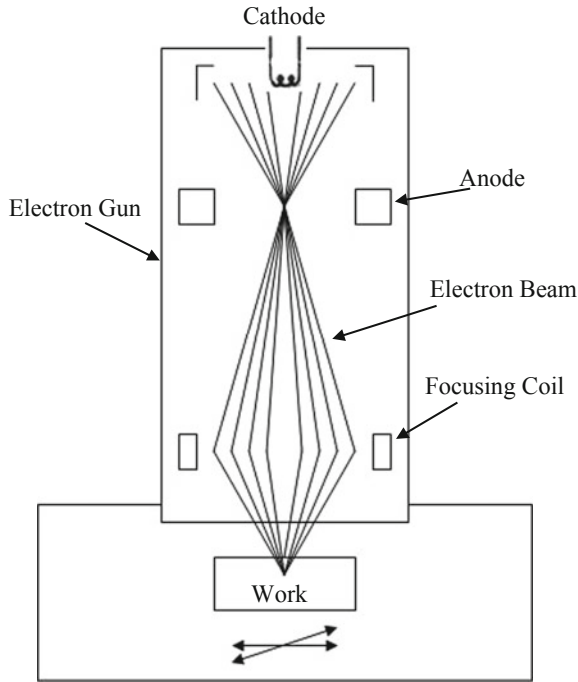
Schematic illustration of electron beam welding setup
